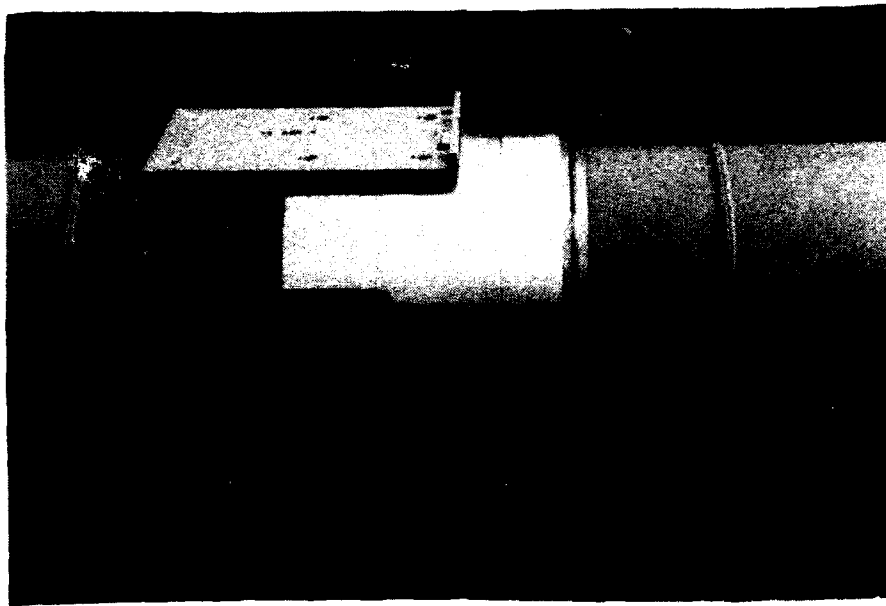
The Polyscann Ultrasonic Butt-Fusion Inspection System.
